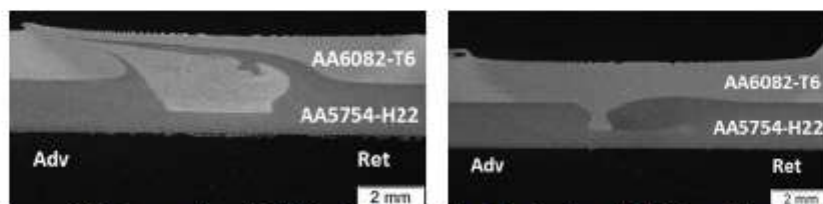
Macrographs of FSW lap joints produced by tools with different designs [4].
